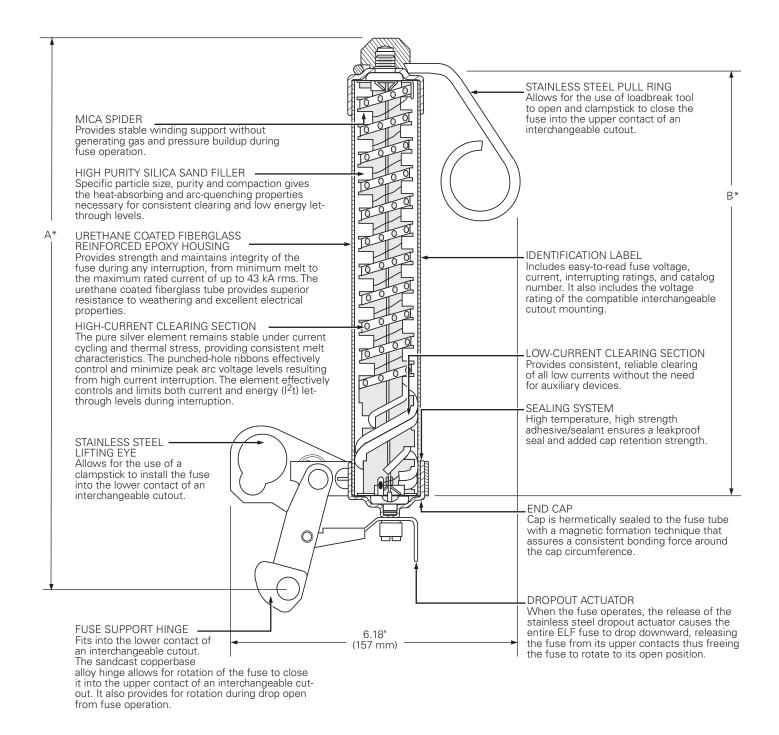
Line illustration of single-barrel ELF fuse cutaway with dimensions.
